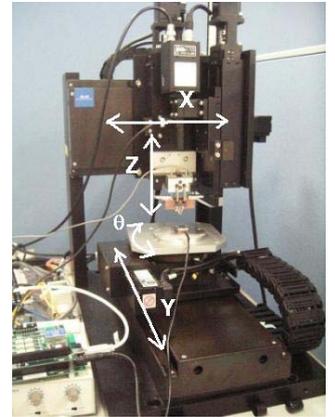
Four D.O.F. Assembly Robot (AJI Co., Ltd.)
